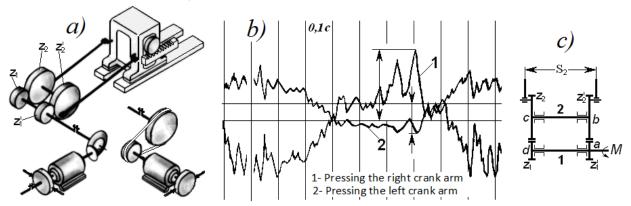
Kinematic diagram of the main drive of the mill HPT-32 efforts in the waveform diagram of a rod and torque transmission from the drive gears coupled to the cranks.
